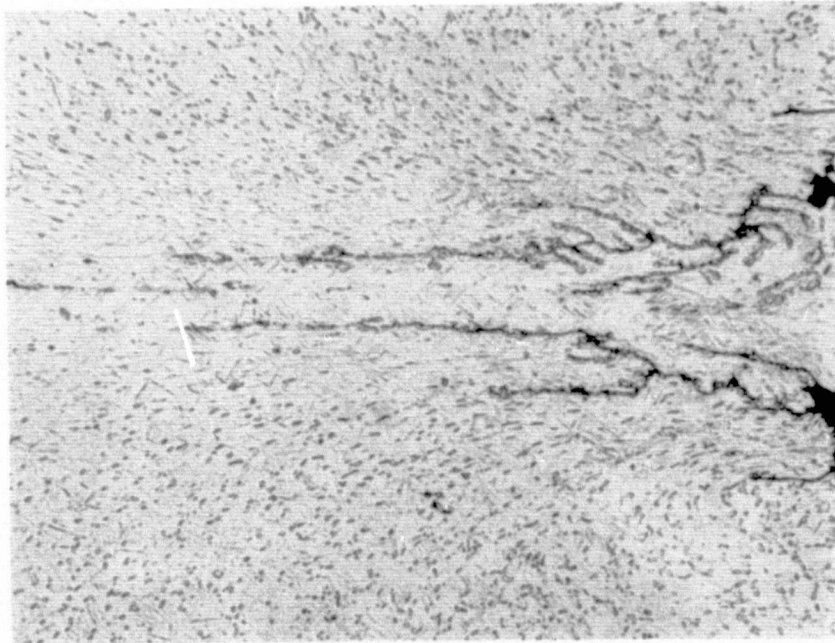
Control Weld Nugget at 400X. (Unbroken section of control weld nugget after etching. Crack-like extensions from the weld periphery into the weld area are shown.)
